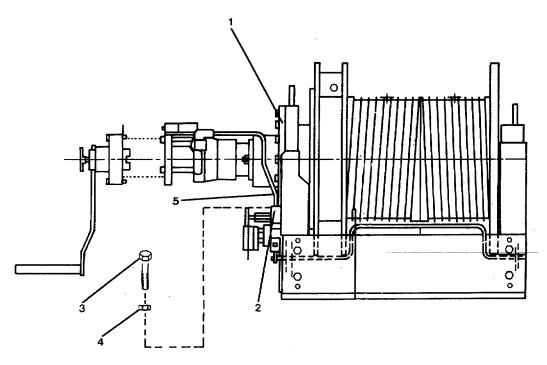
Hydraulic Winch Assembly Shutoff Valve Replacement.
